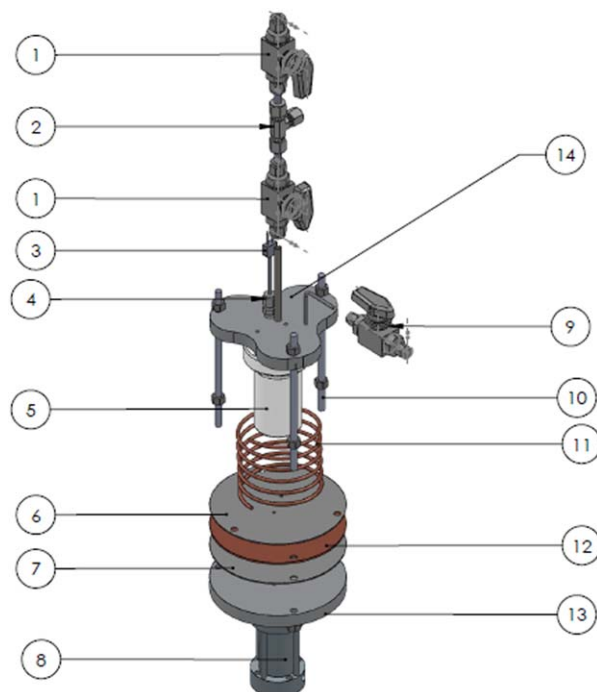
Diagram of the JBR: (1) on/off feed valves; (2) Inlet of carrier gas; (3) Thermocouple; (4) Inlet of feed and carrier gas; (5) Ceramic crucible with insulation; (6) Insulation disk; (7) Insulation disk; (8) Linear pneumatic actuator; (9) Outlet gas valve; (10) Stainless steel support rods; (11) Copper coil; (12) Copper disk; (13) Aluminum disk mounted on the actuator; and (14) Stainless steel scalloped disk.
